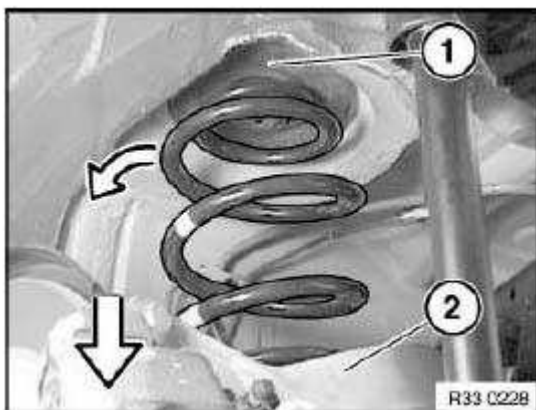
Removing Upper Spring Pad From Take-Up Locator/Frame Side Member
